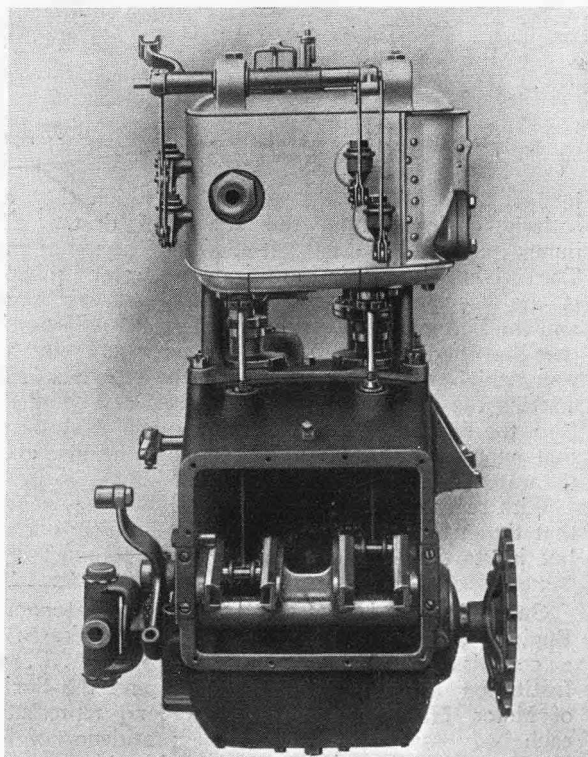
Offside view of the White engine, showing side inspection door of crank chamber detached exposing the Joy valve gear.
